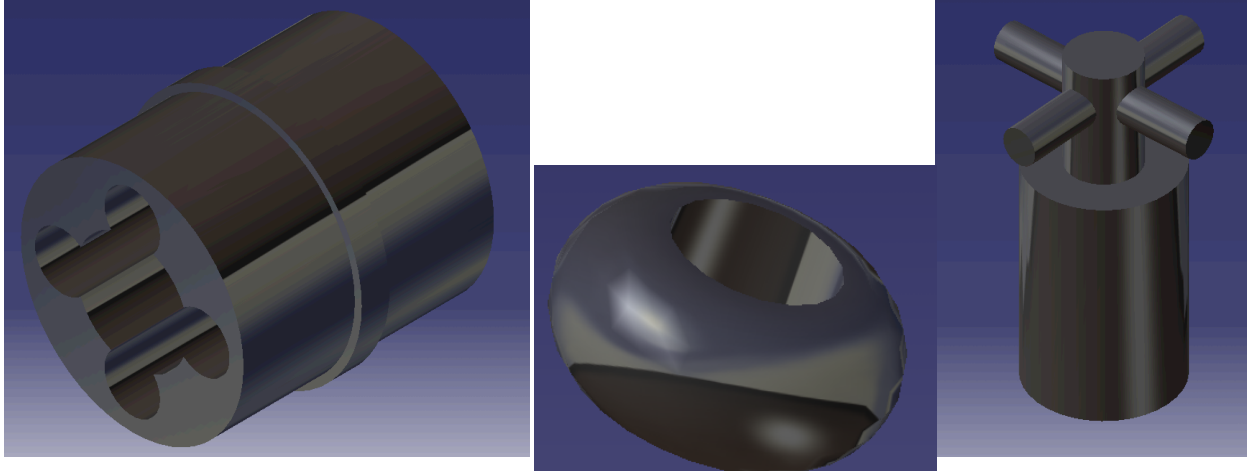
From left to right: C.V. joint, roller, and roller holder
